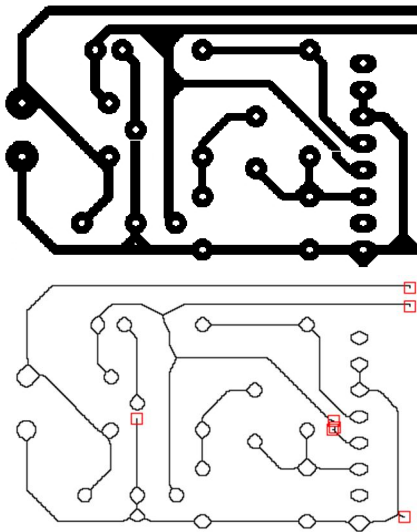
PCB with defects and skeleton with their coordinates
